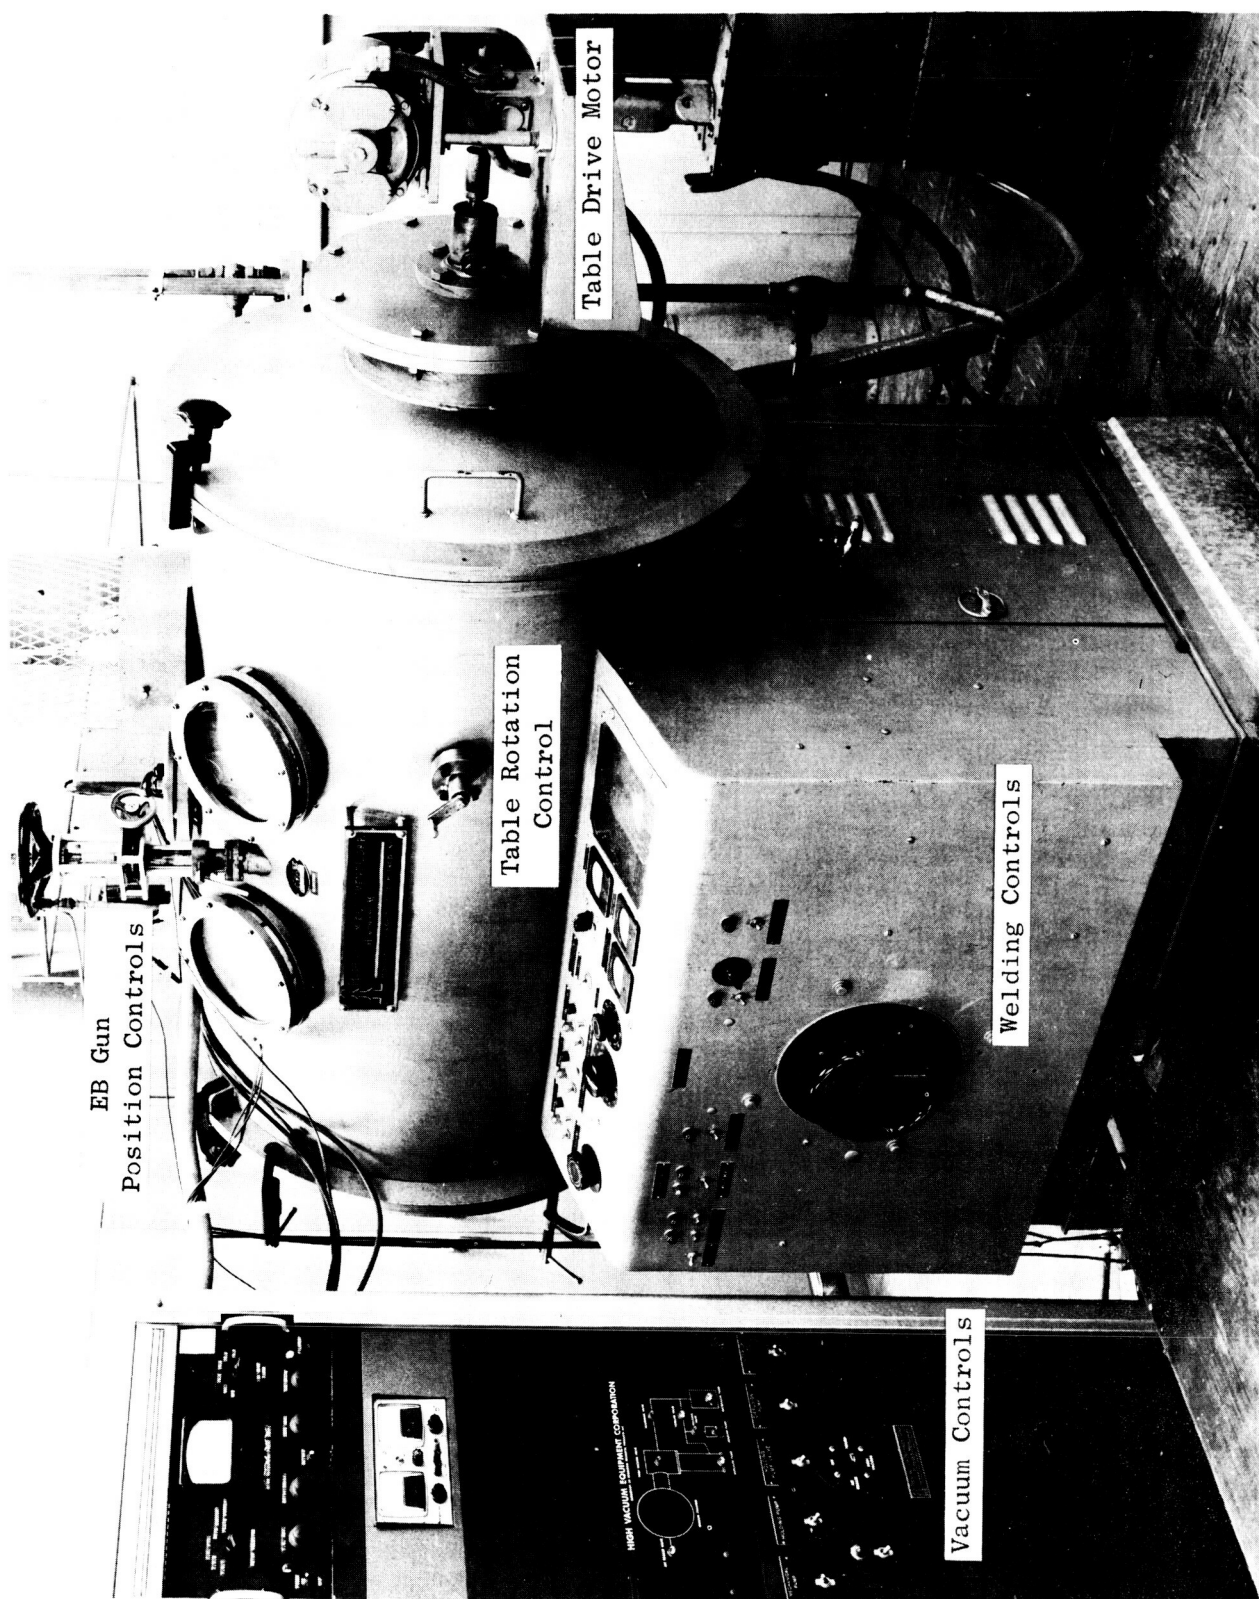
30KV Electron Beam Welding Chamber and Controls Used to Fill Corrosion Capsules with Potassium. (C64121619)
